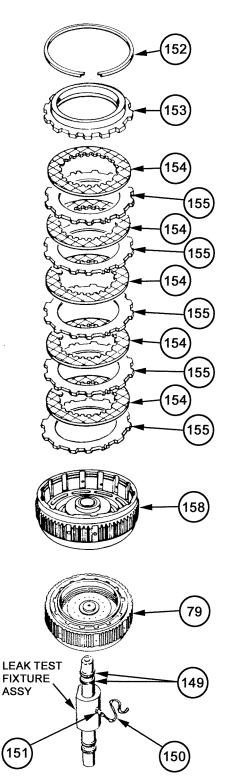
Fourth and Reverse Clutch Housing Assembly Components.
